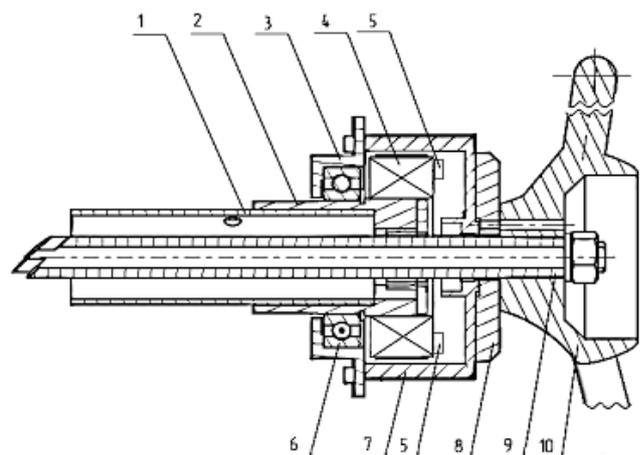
Electromechanical part of the mechatronic steering module with a brushless DC motor: 1 – steering column, 2 – stator core flange, 3 – bearing housing, 4 – stator, 5 – Hall sensors, 6 – bearing, 7 – rotor, 8 – rotor flange, 9 – steering wheel shaft, 10 – steering wheel
